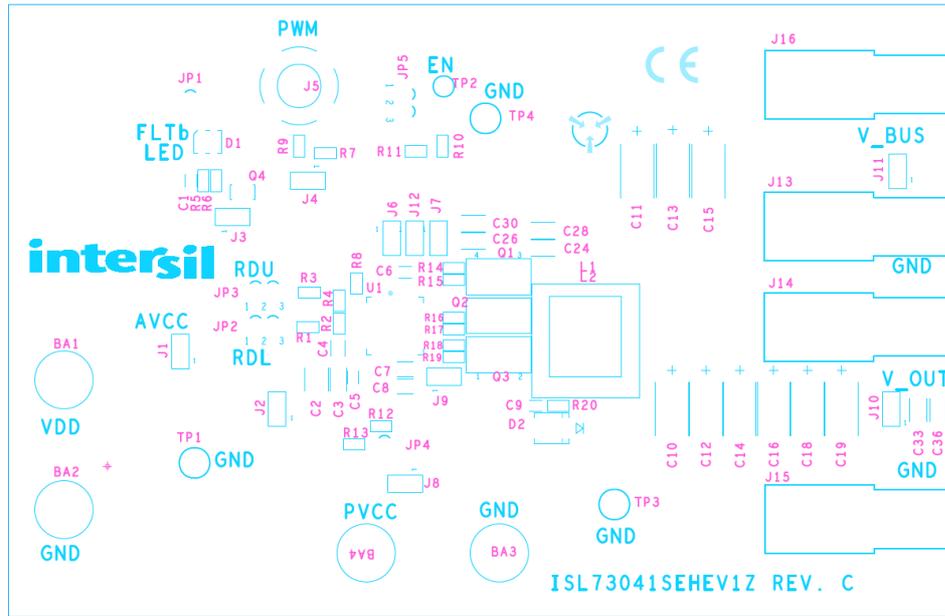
ISL73041SEHEV1Z Top Assembly Layer
